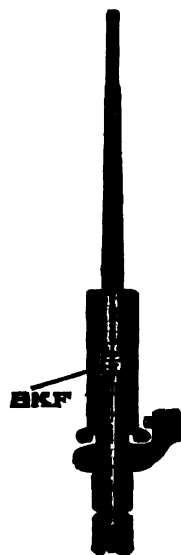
SEC. 10rr.—Silk spindle with section cut away to show ball bearing.
